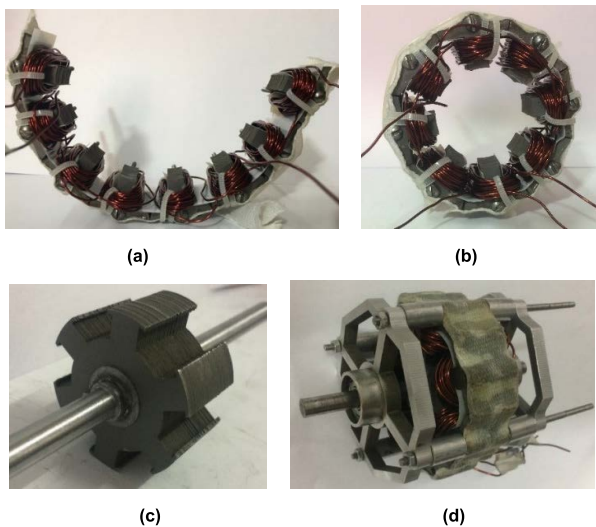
Prototype of the octane modular stator EEFSM (a) unfolded stator with windings (b) folded stator with windings (c) rotor with RPS (d) complete motor-assembly.
